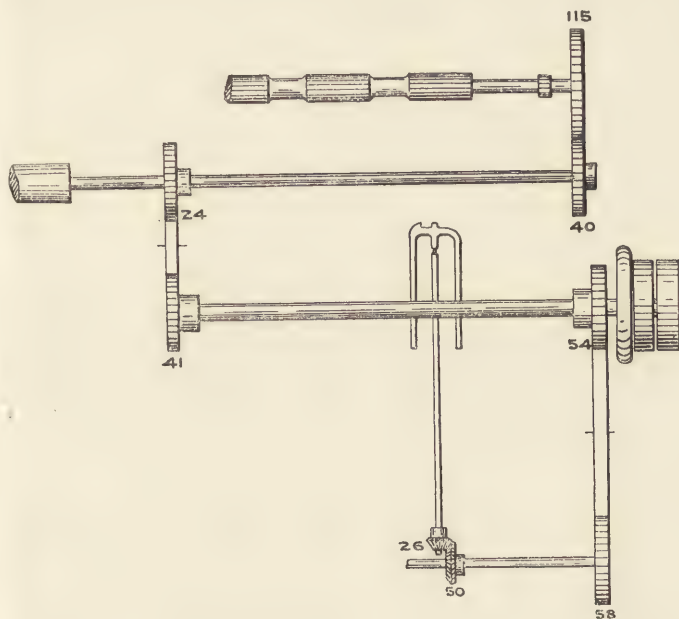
DIAGRAM SHOWING DRIVING FOR FRONT ROLLER OF FLY FRAME.
